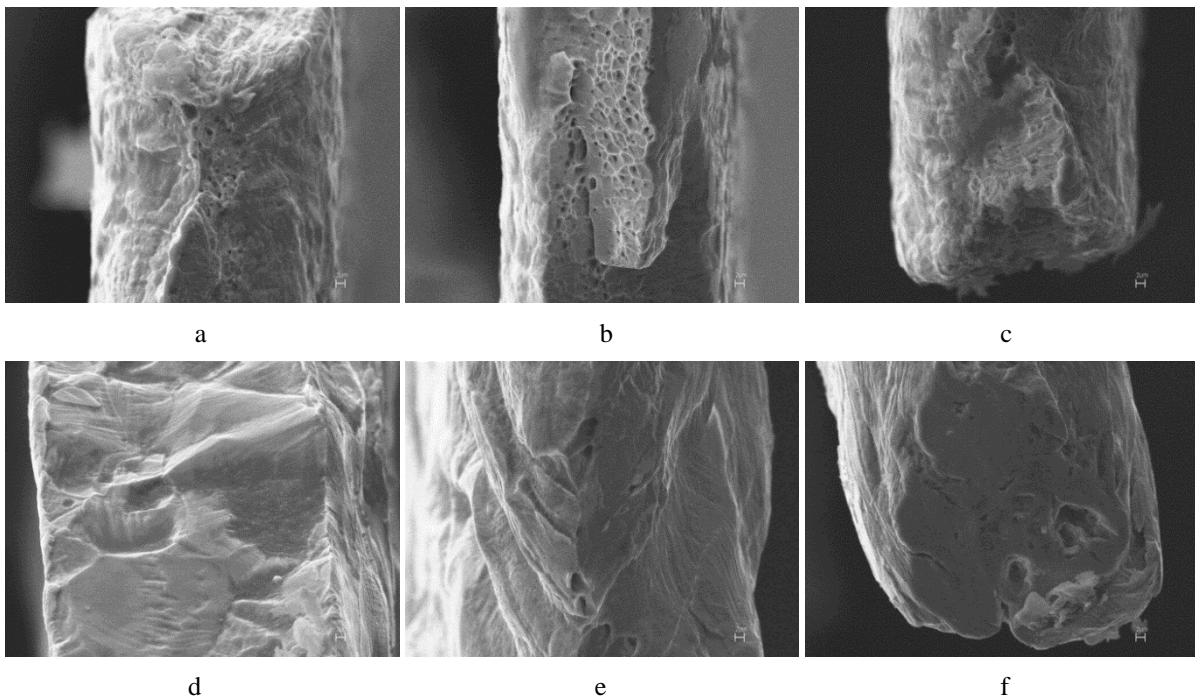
SEM fracture morphologies (3000 \times) of as-received AISI304L foil in (a) the initiation, (b) middle and (c) end of the fracture surface. Fracture morphologies (3000 \times) of as-received AISI439 foil in the initiation, middle and end of the fracture surface are shown in d), e) and f). The corresponding positions are shown in Fig. 4, g and Fig. 5, g as A, B, and C
